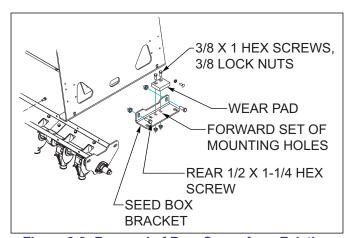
Removal of Rear Screw from Existing Seed Box Bracket
